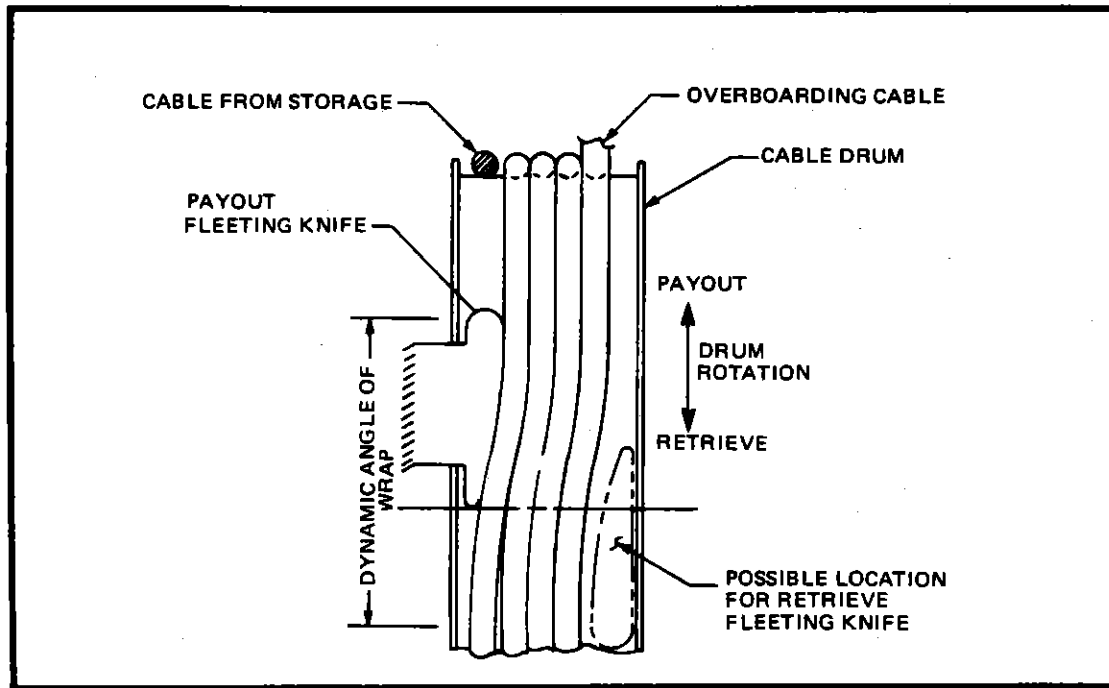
Typical Arrangement of Fleeting Knives on Drum Tensioner
